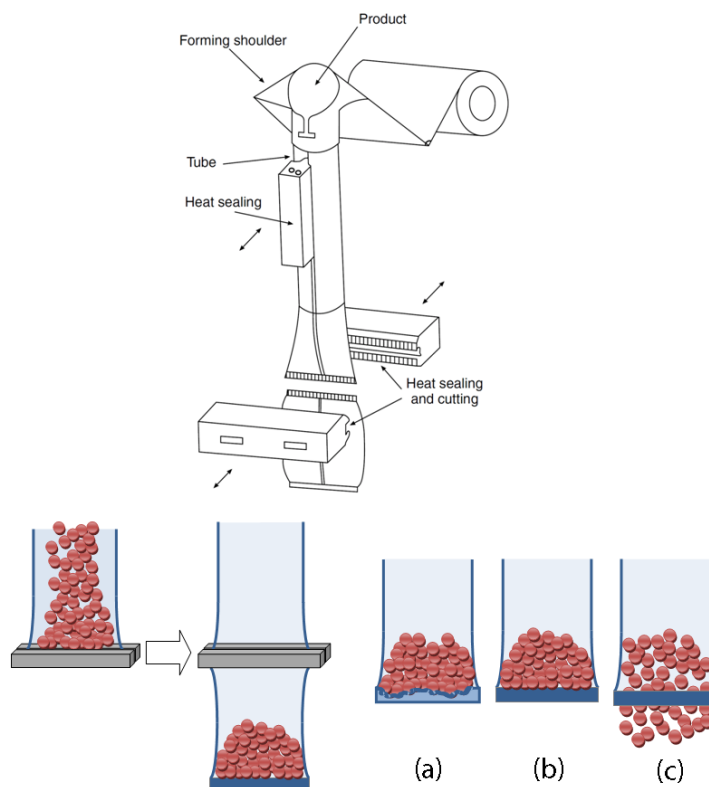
Schematic of a vertical form fill seal machine (VFFS) (Mesnil et al., 2000), and the schematic of weight bearing of seal in a VFFS process while it is still molten and hot (a) a deformed seal (b) a good seal (c) a weak seal with poor hot tack
